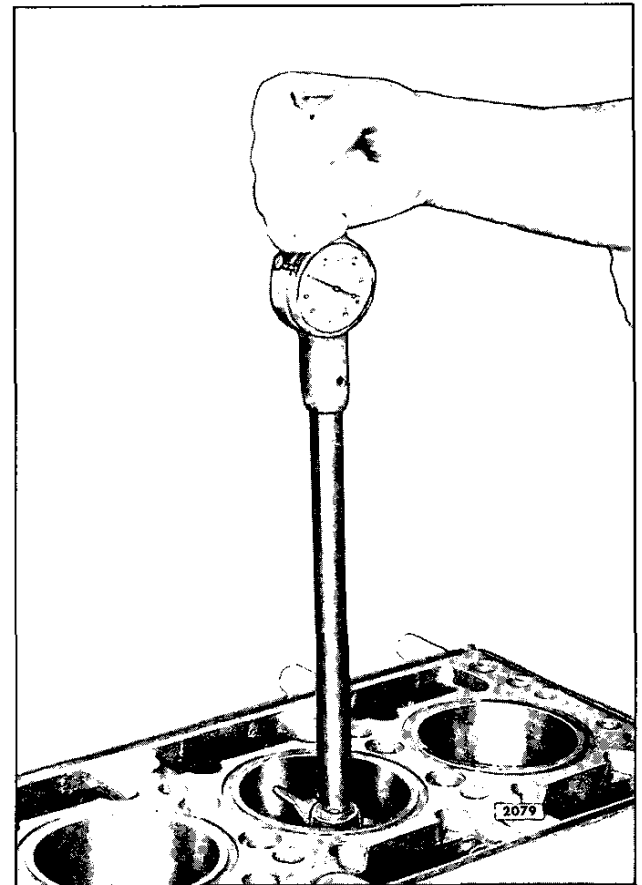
Checking Bore of Cylinder Liner Using Tool J 5347-B
